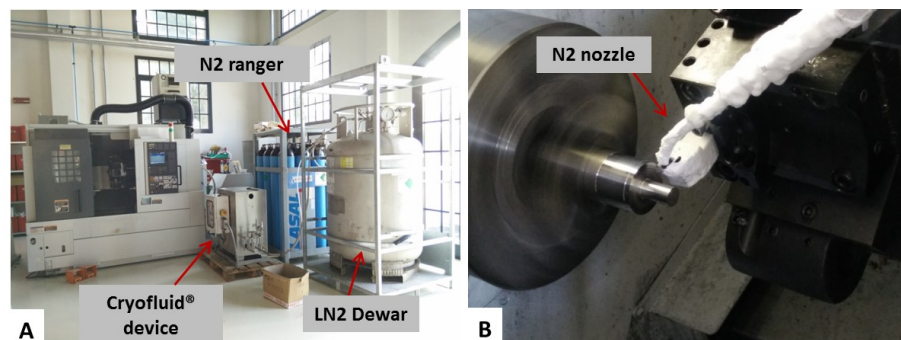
Experimental apparatus for Cryofluid™ technologies: (A) overall view of the equipment, (B) detail of the cutting zone.
